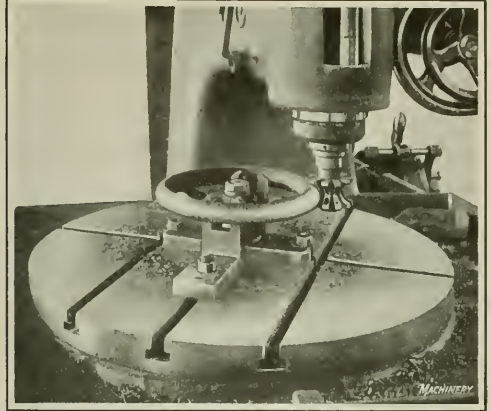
Set-up for machining Rim of Milling Machine Handwheels
